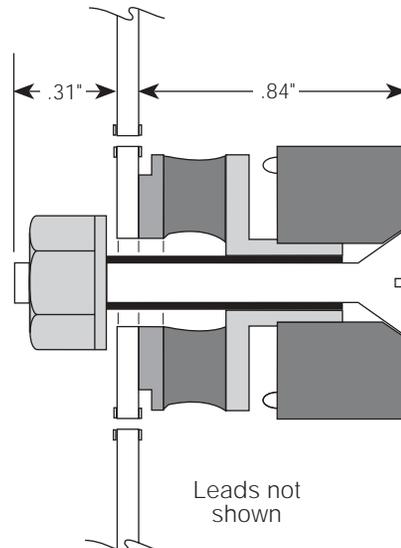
The standard profile, PC mounting, horizontal ISO-SOCKET is shown above. The contacts are silver plated brass, the socket body is white ceramic and silicone foam is used for the decoupling elastomer.
